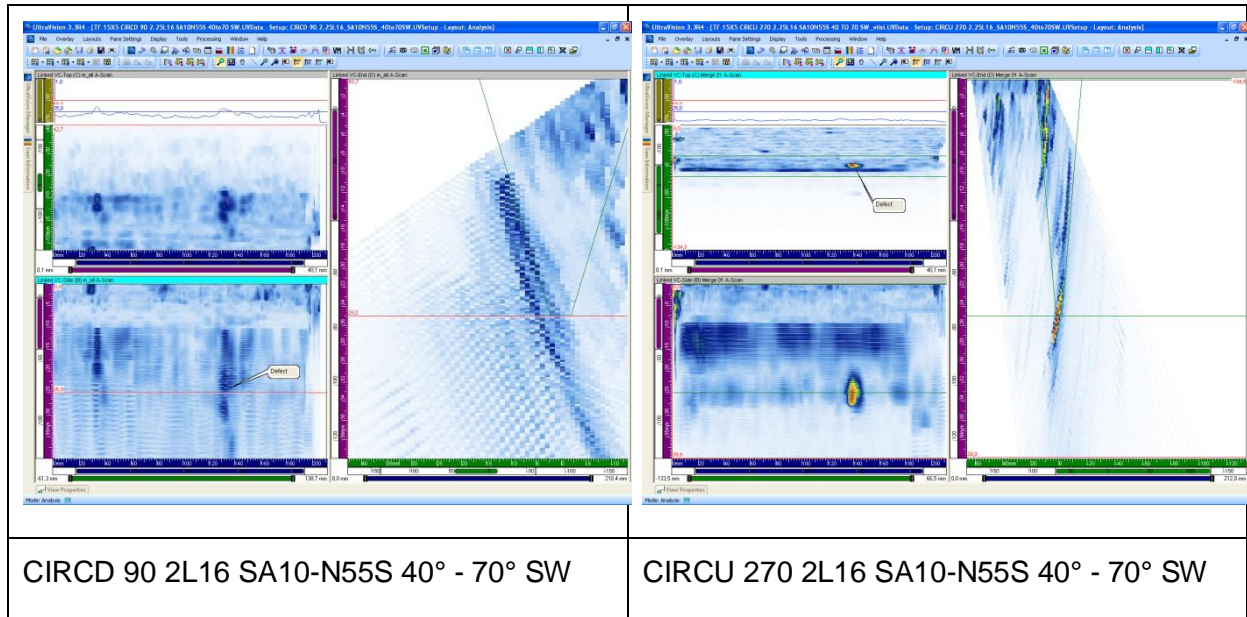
General views of weld TF scanned with technique PA-2 using 2 MHz probe.
